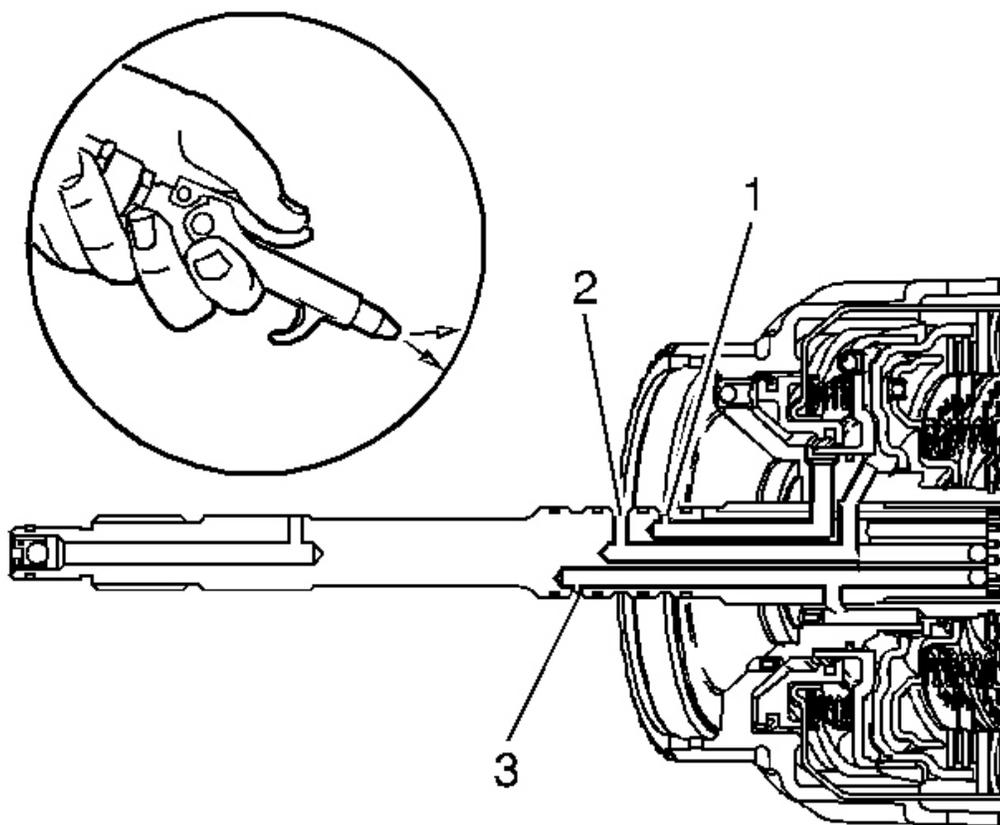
Applying Air Into Feed Holes In Turbine Shaft
